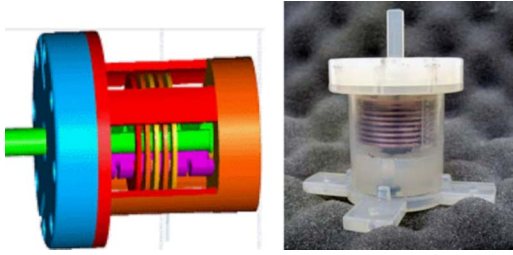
Assembled multiple flat-plate ERF resistive actuator: CAD drawing (left) and experimental prototype (right)
